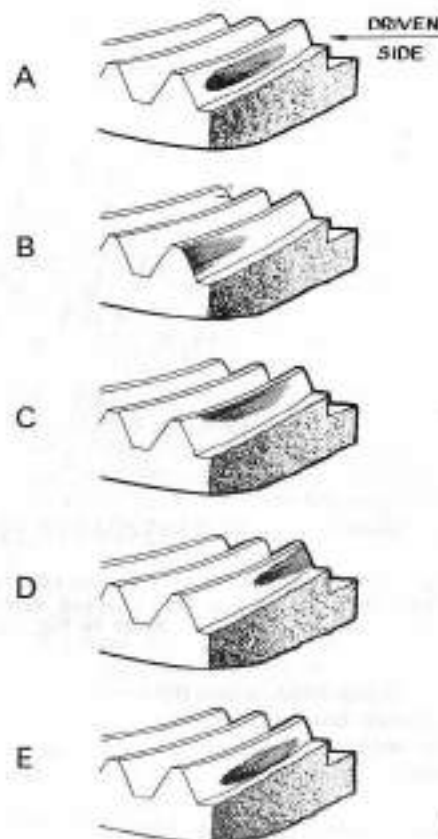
Views showing possible bevel gear tooth contact patterns for guide in adjusting pinion mesh position for all models except model 1200. Tooth contact pattern shown in view "A" indicates correct mesh position; views "B" through "E" show possible patterns indicating readjustment of mesh position. Refer to text.
